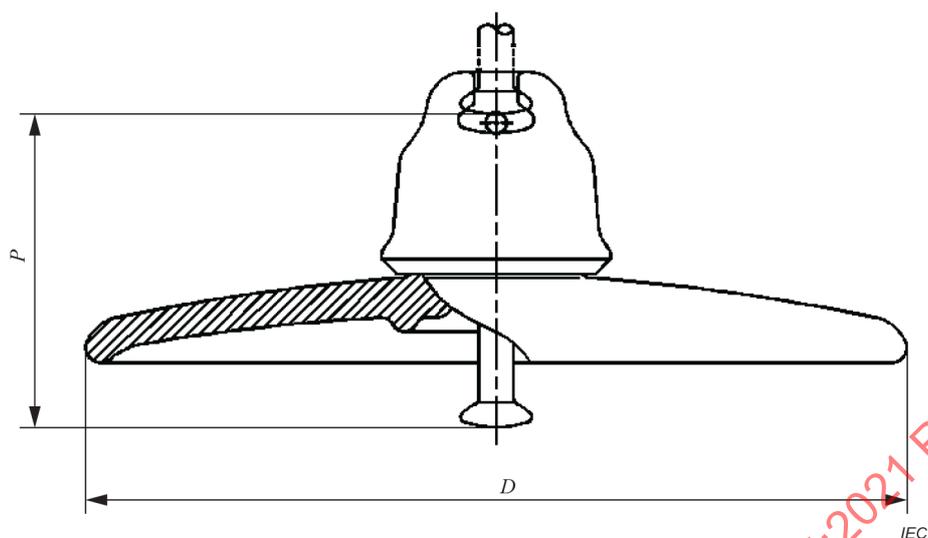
String insulator unit of aerodynamic profile with ball and socket coupling
